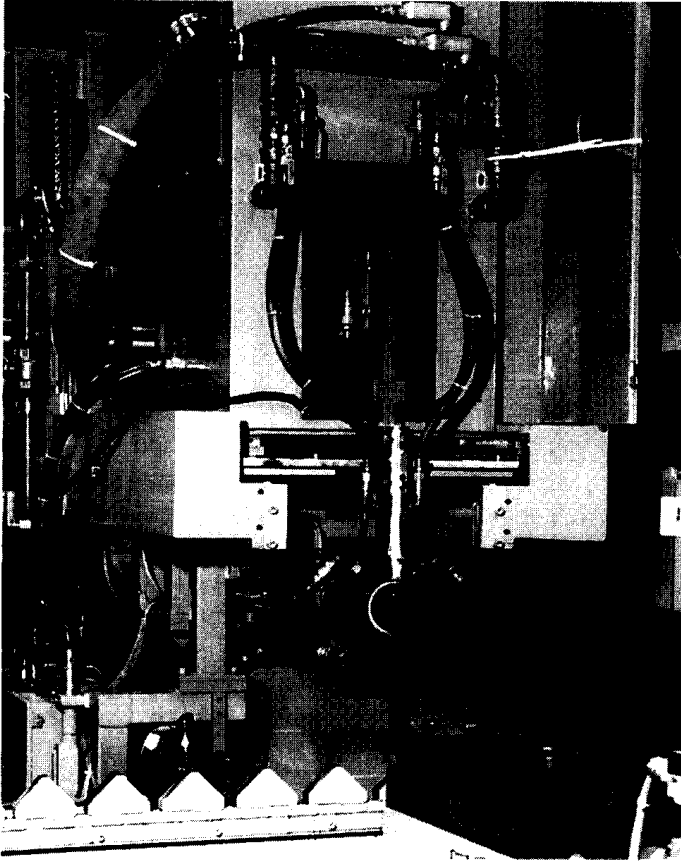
Walking beam equipment with movable inductor and power supply. This system uses a 200 kW/10 kHz power supply. A servomotor is used to move the power supply and coil assembly for scan hardening. (Courtesy of INDUCTOHEAT, Inc.)
